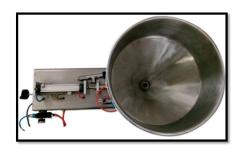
Top view of Semi-Automated Paste Filling Machine for Spicy Shrimp Paste
